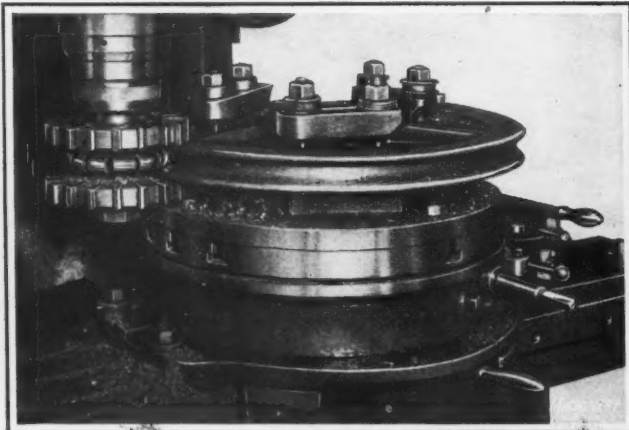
First of Three Set-ups for machining a Crane Sheave
